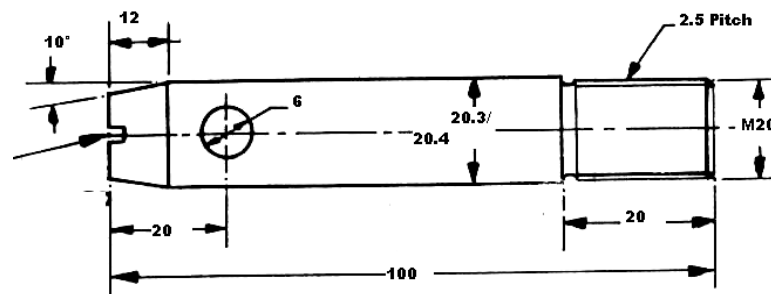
GUIDE STUD M20 (Tool No. 1405976)
